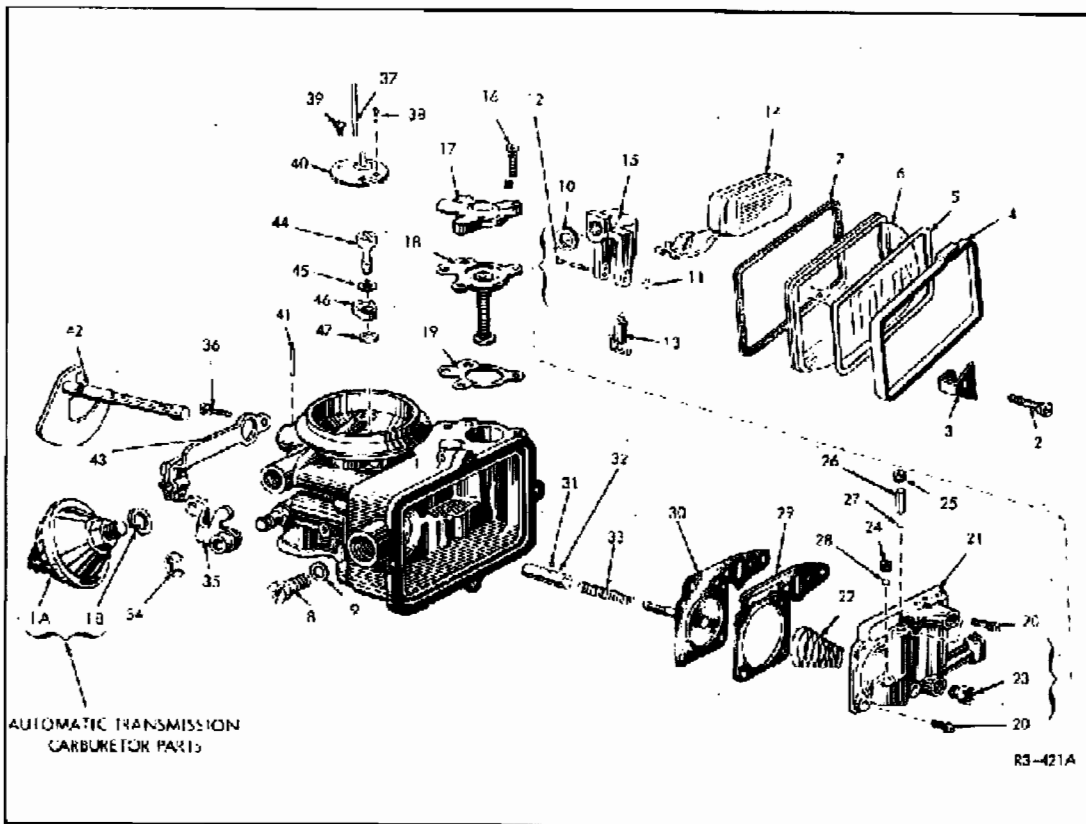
DISASSEMBLY - MAIN BODY ASSEMBLY
